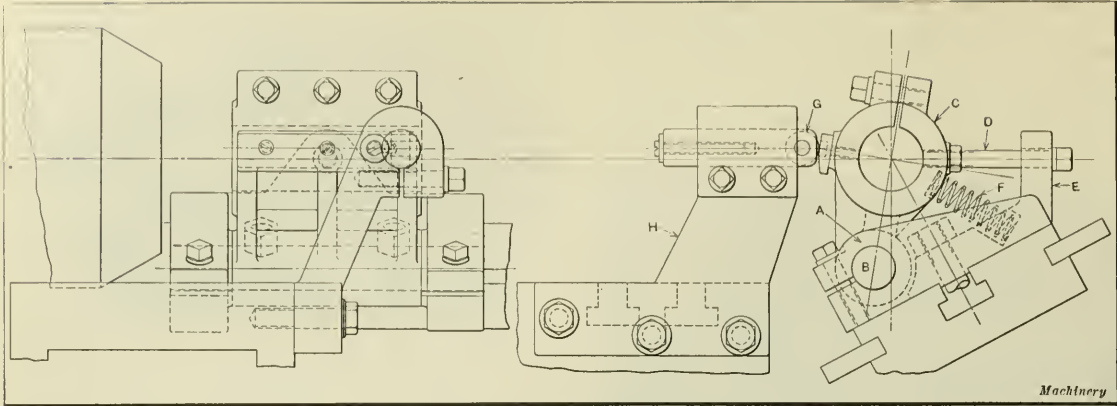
Another Type of Internal Necking or Recessing Tool-holder
